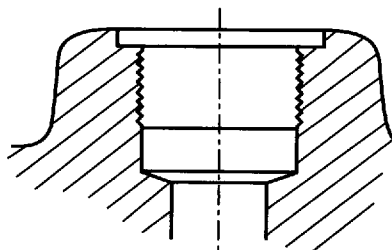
Machined Face Suitable for Gasket Containment When Using Cylindrical Threads
